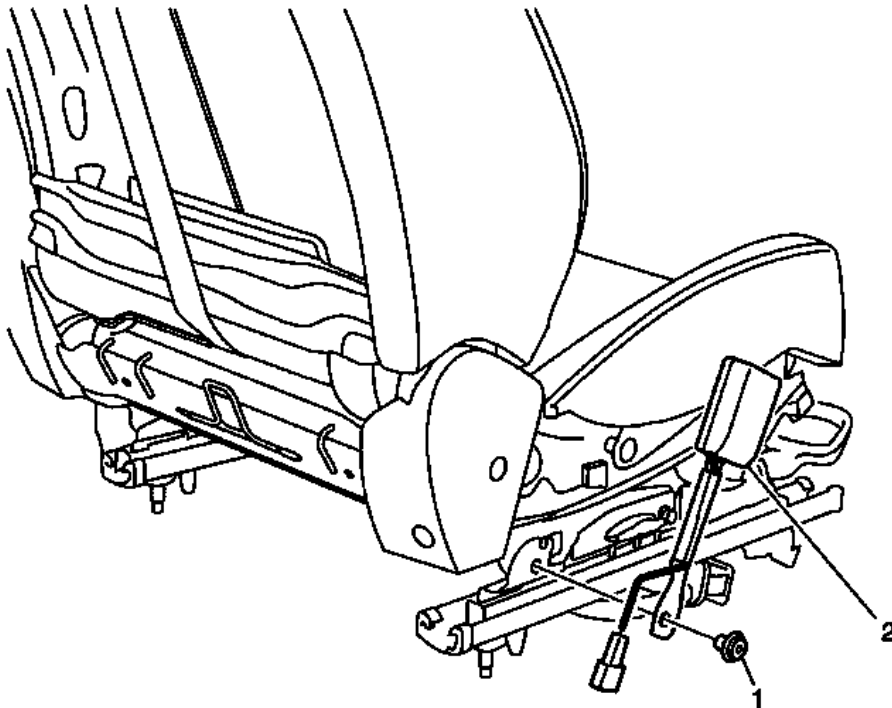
Driver Or Passenger Seat Belt Buckle & Fastener
